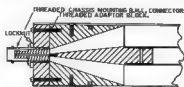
Assembly of BNC Threaded Chassis Mounting Connector
